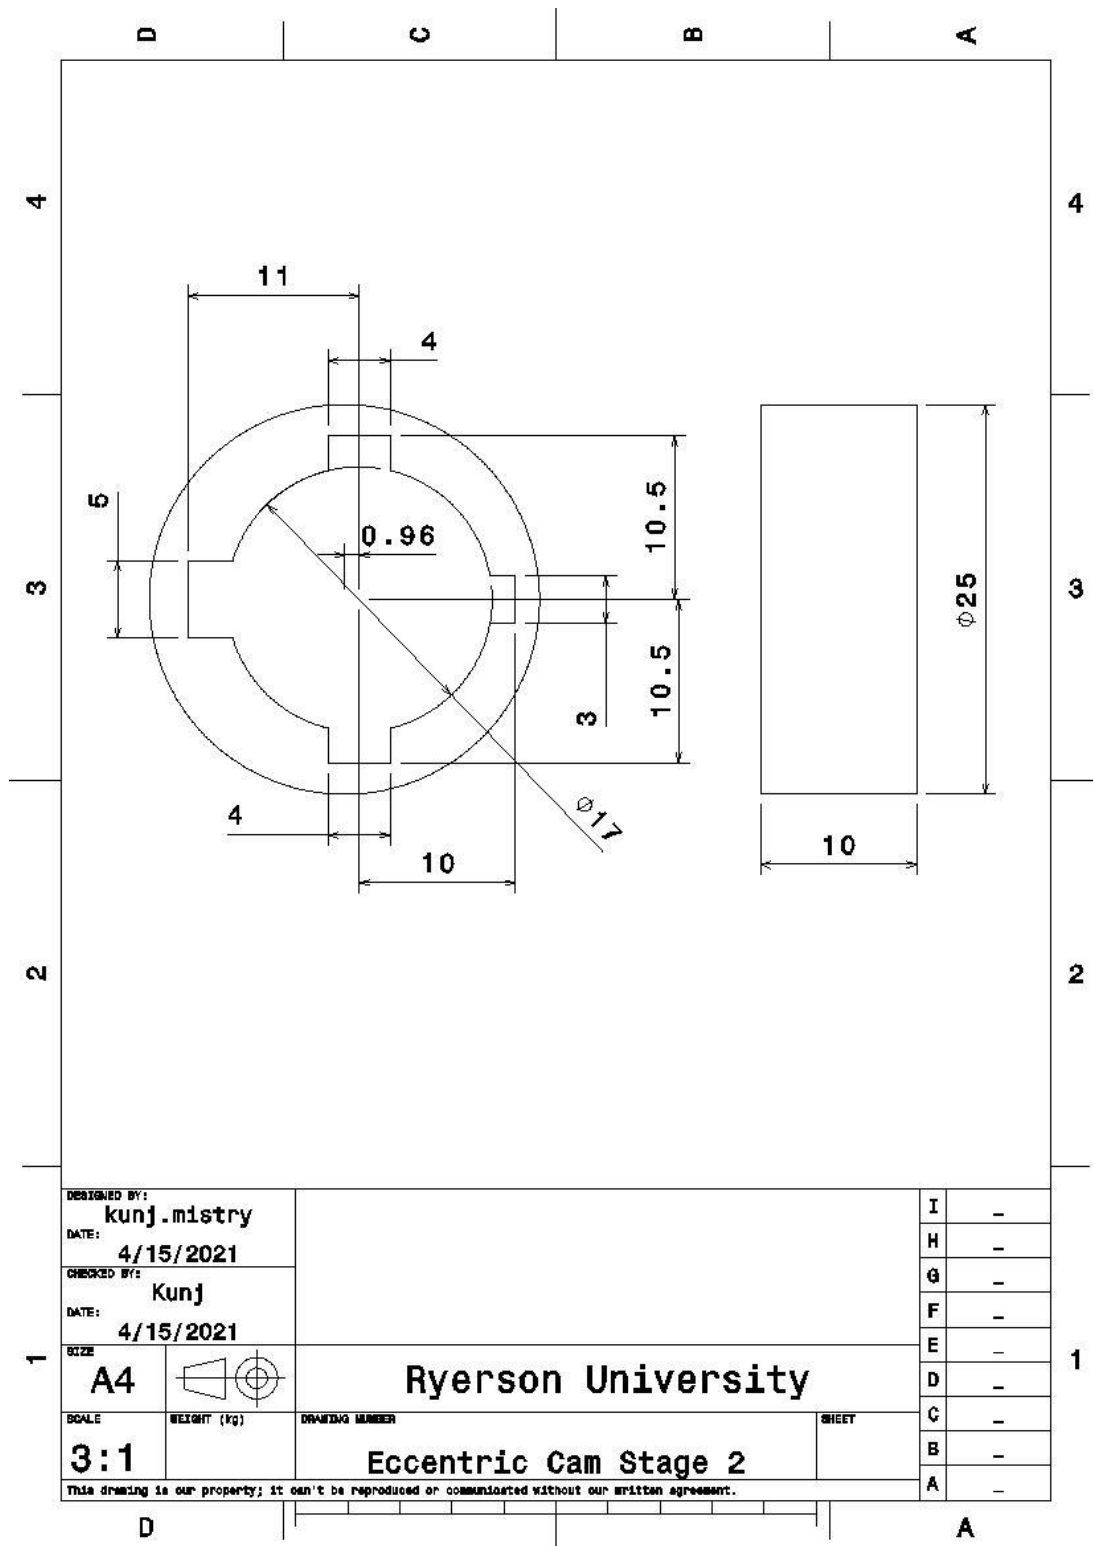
Eccentric cam stage 2 engineering drawing.
